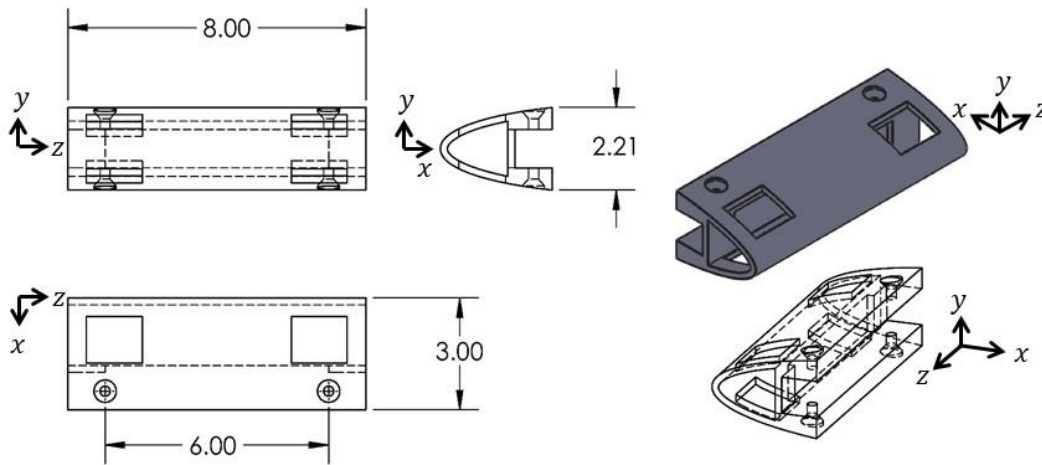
Line drawings of multi-waveguide sensor body [All dimensions are in inches]
